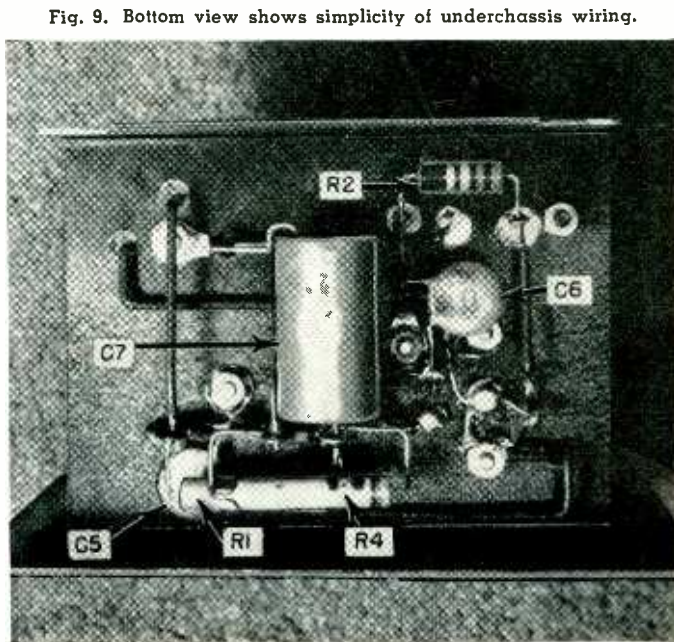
Bottom view shows simplicity of underchassis wiring.
